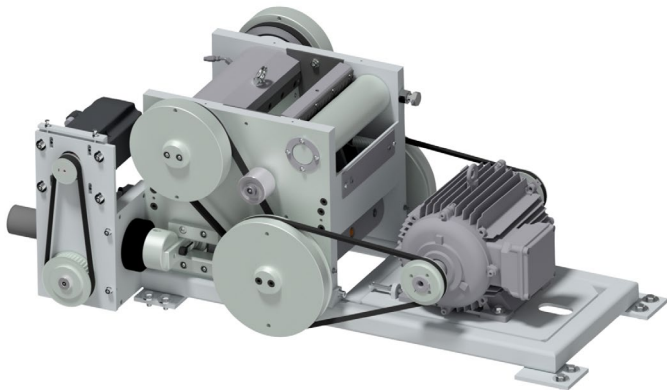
CAD drawing of the HSC 650D, the double-acting jaw crusher
